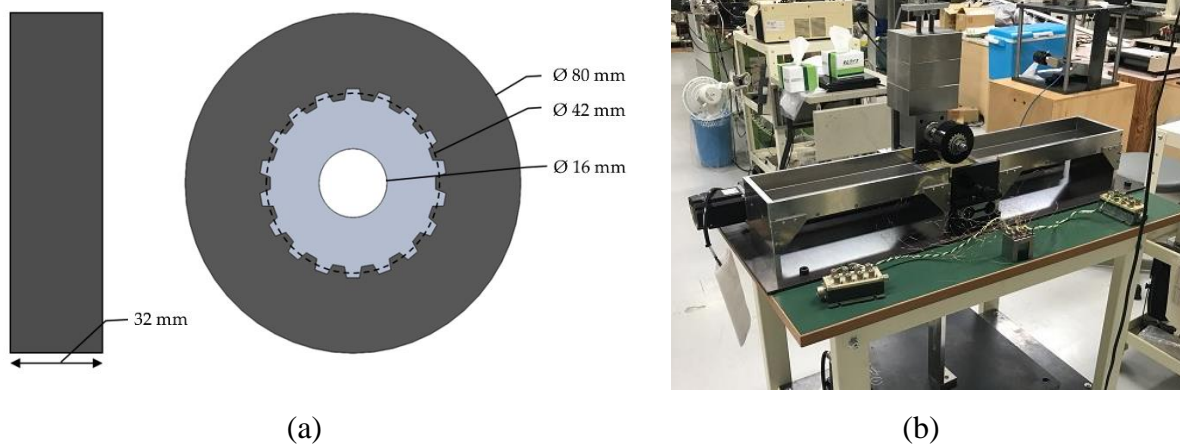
Rubber-wheel dimensions and assembled experimental device
